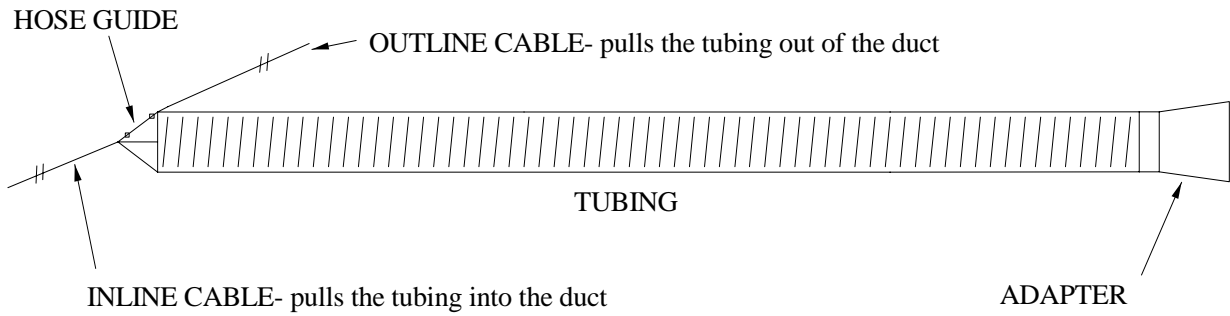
CABLE TO TUBING ASSEMBLY LAYOUT
